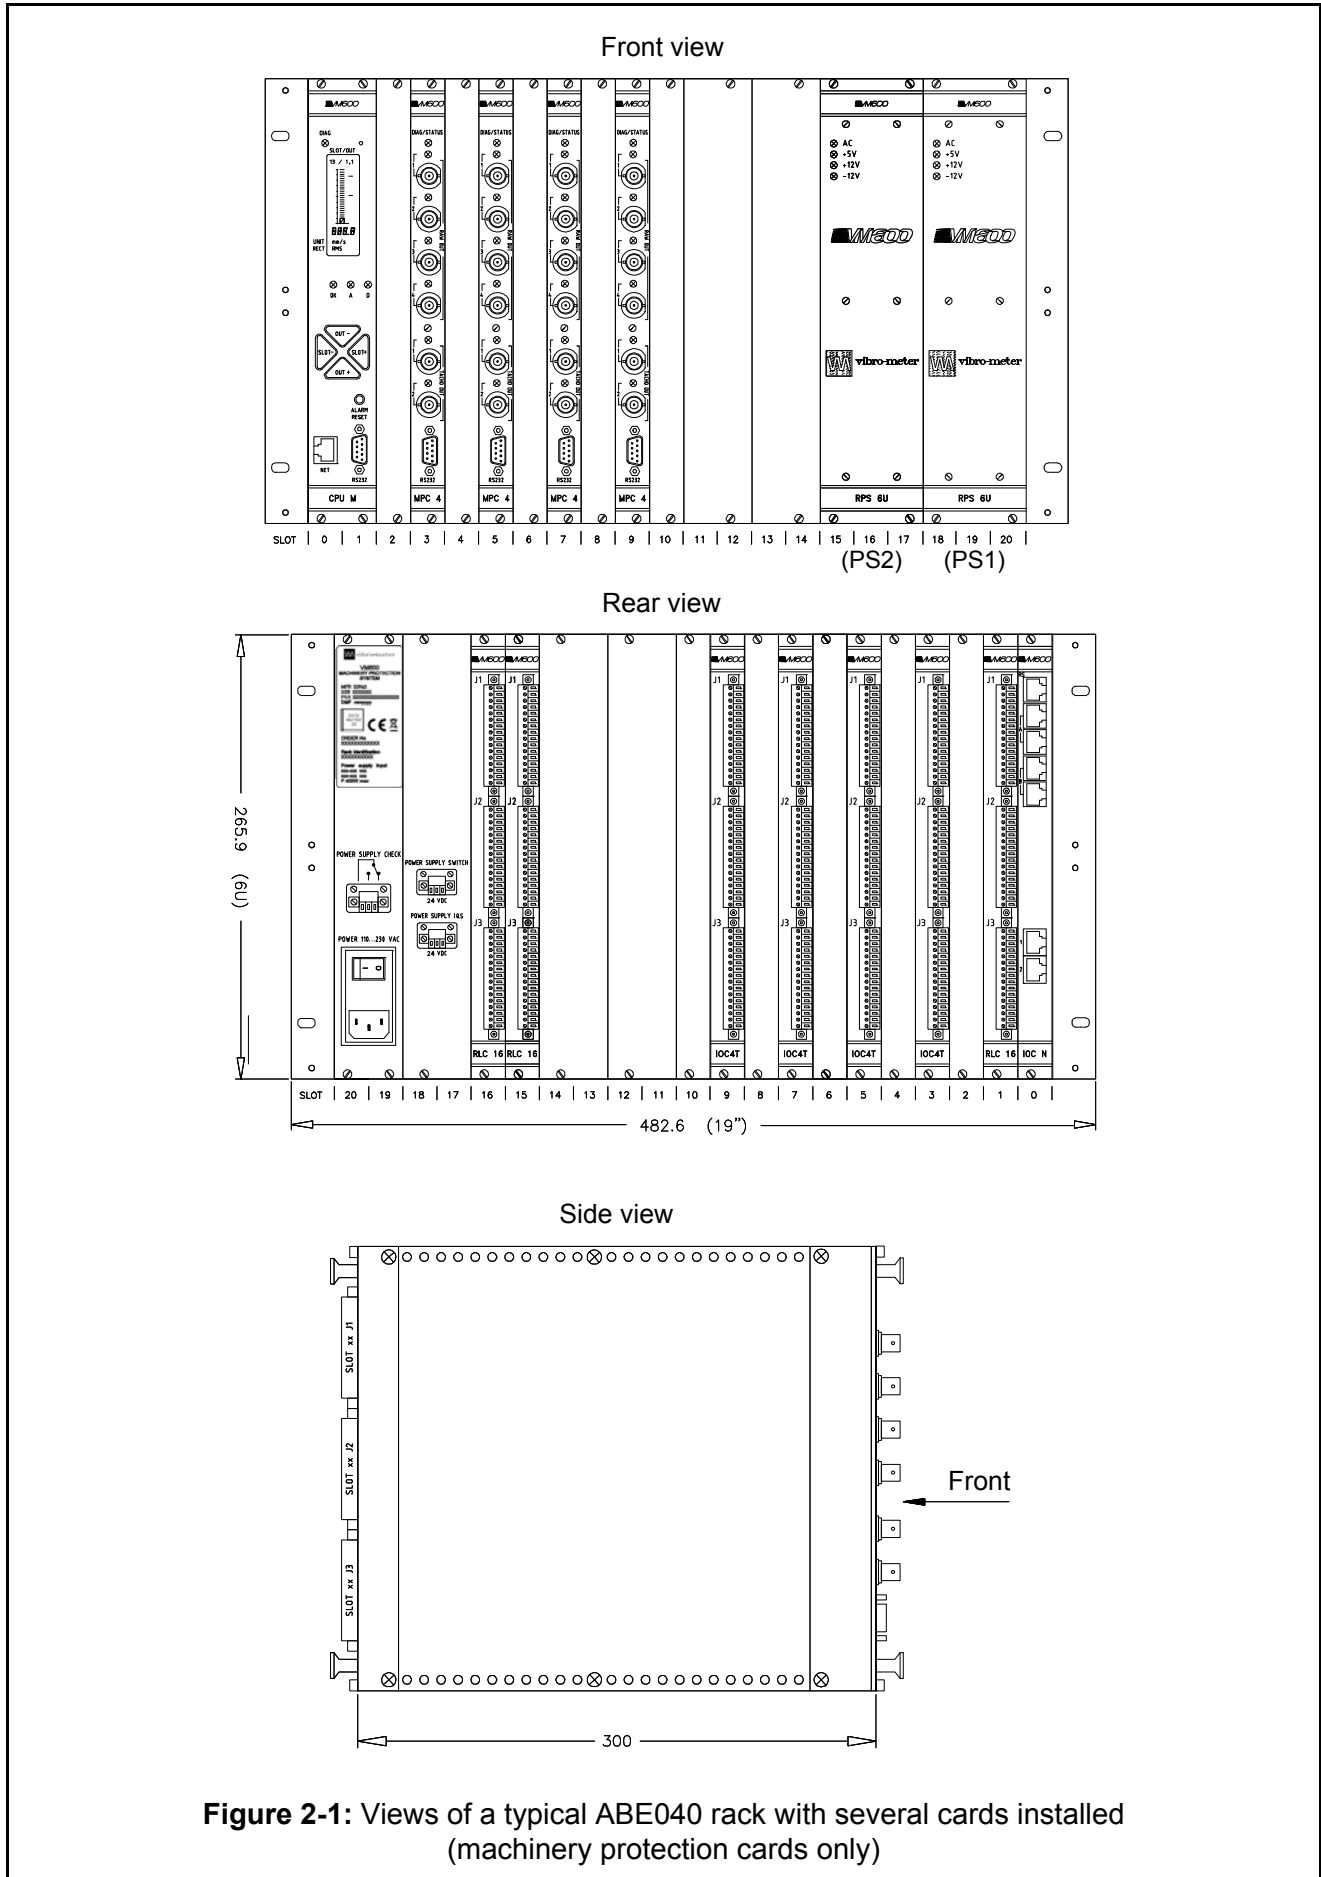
Views of a typical ABE040 rack with several cards installed (machinery protection cards only)
